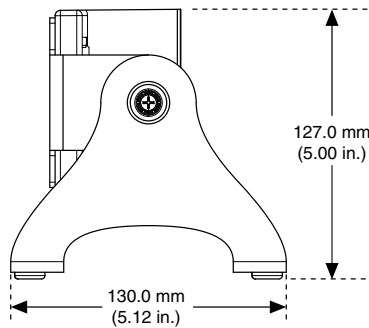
4 Slot cRIO-905x Desktop Mounting Front Dimensions
